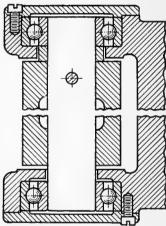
Arm joint designed for accuracy. Upper ball bearing takes all thrust caused by weight, and the spindle is pinned to the stationary member. The bearing has a light press fit.
